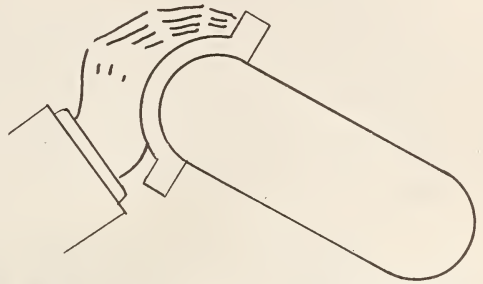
Method of rocking cap bearing or connecting rod bearing on crank pin by hand.
